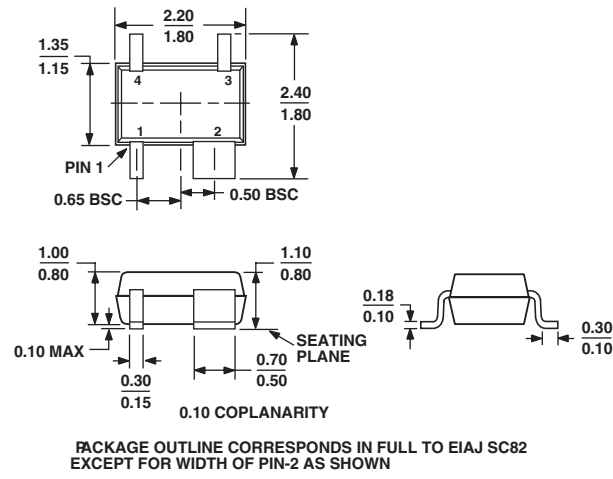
4-Lead Plastic Surface Mount Package [SC70]
